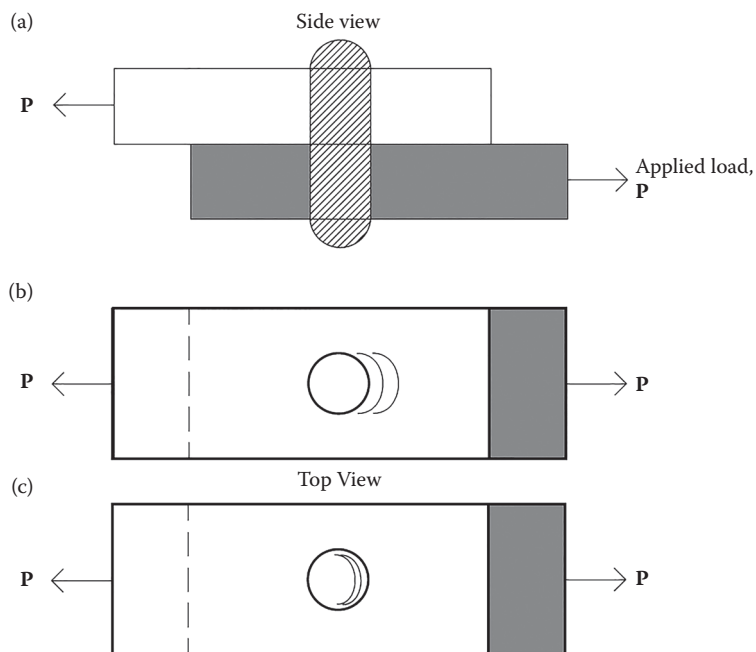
Illustration showing (a) section, (b) compression into sheet adjacent hole, and (c) compression being induced upon the rivet due to the top plate being pulled into the rivet
